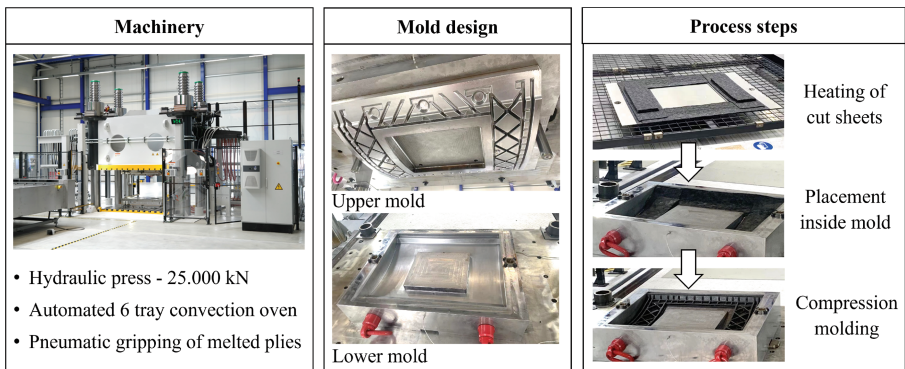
Manufacturing setup. Left: hydraulic press; middle: upper and lower halves of the two-piece mold; right: basic processing steps of the compression molding process. Image courtesy of CG Rail GmbH, reproduced with permission.
